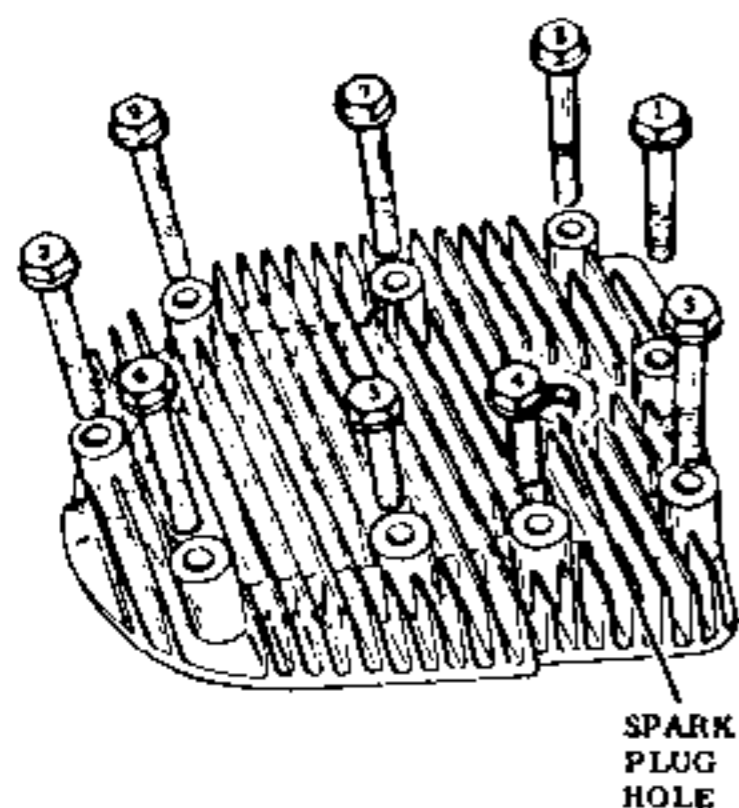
View showing cylinder head cap screw tightening sequence used on early HH80, HH100 and HH120 engines. Tighten cap screws to a torque of 200 in.-lbs. (22.6 N·m). Note type and length of cap screws.
